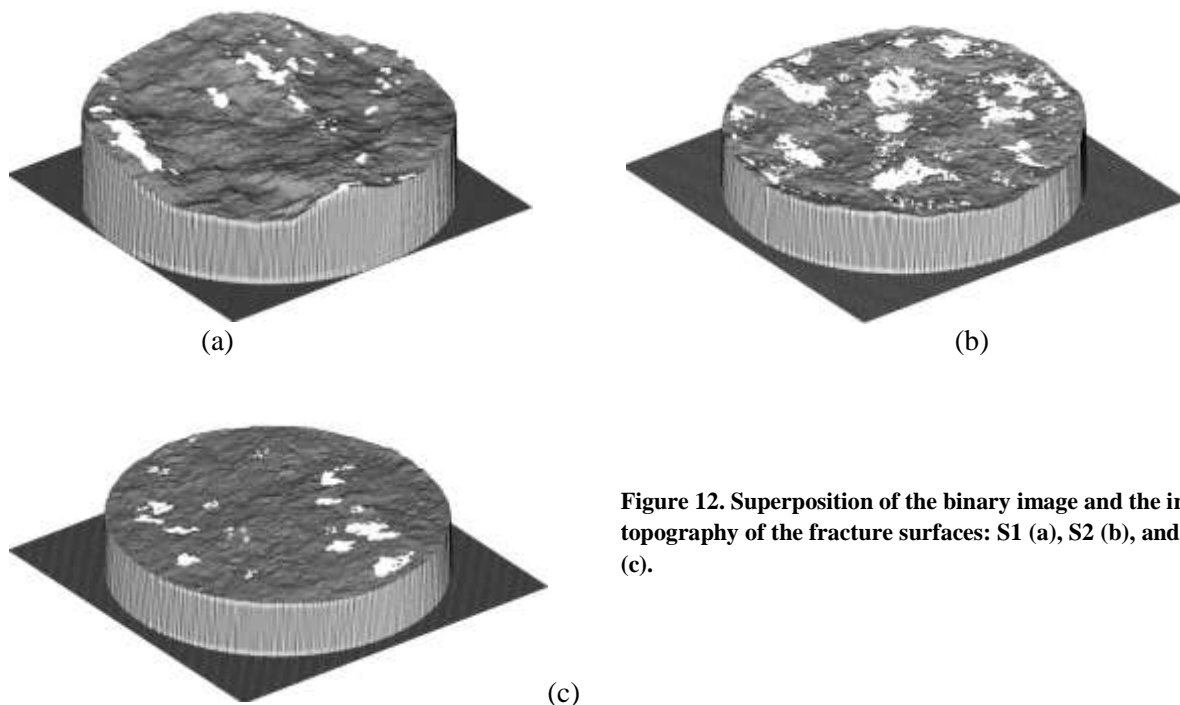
Superposition of the binary image and the initial topography of the fracture surfaces: S1 (a), S2 (b), and S3 (c).
